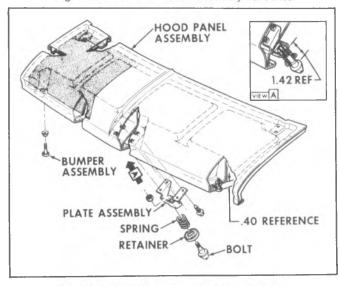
C-7--Hood, Bumpers and Latch-G Series
